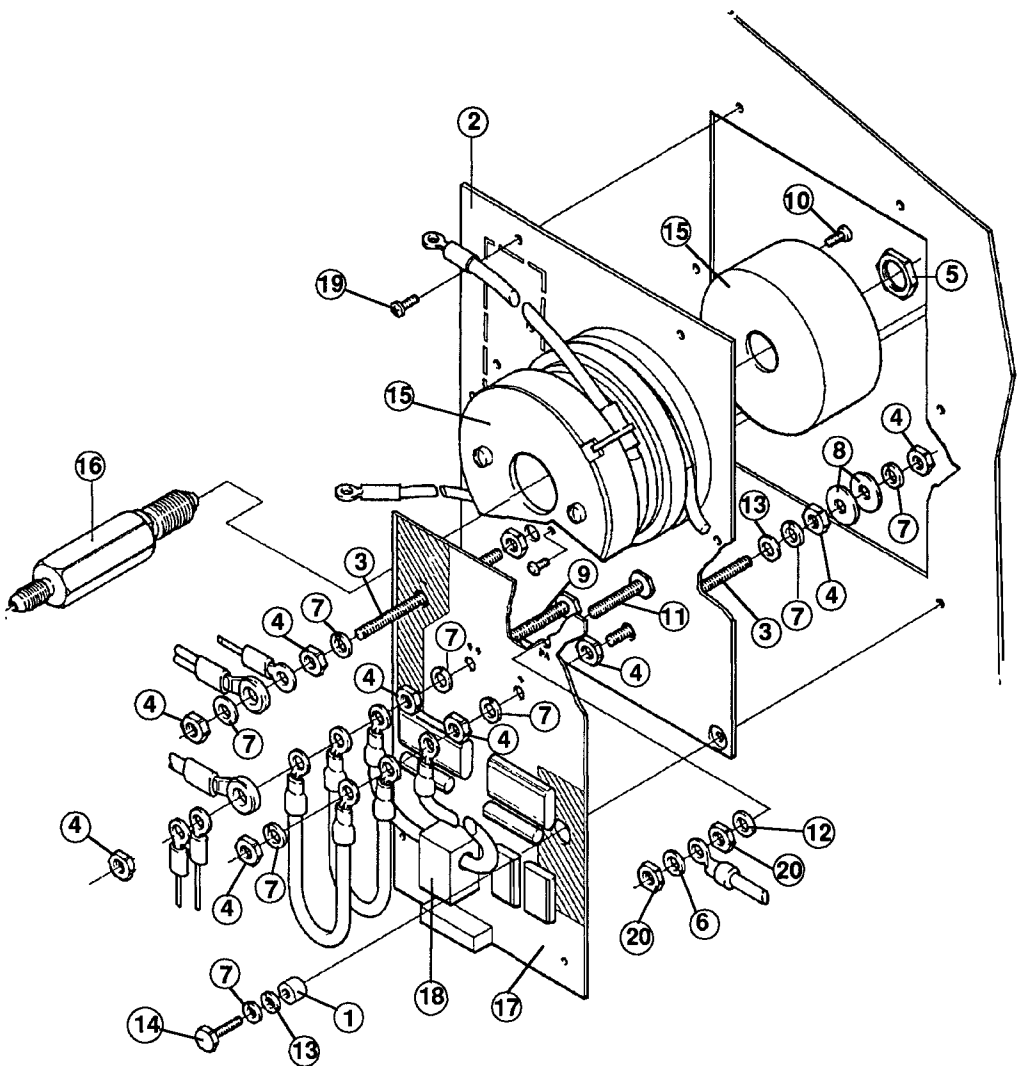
HT4000 Master & Slave Power Supplies - High Frequency & I/O PCB Assembly
